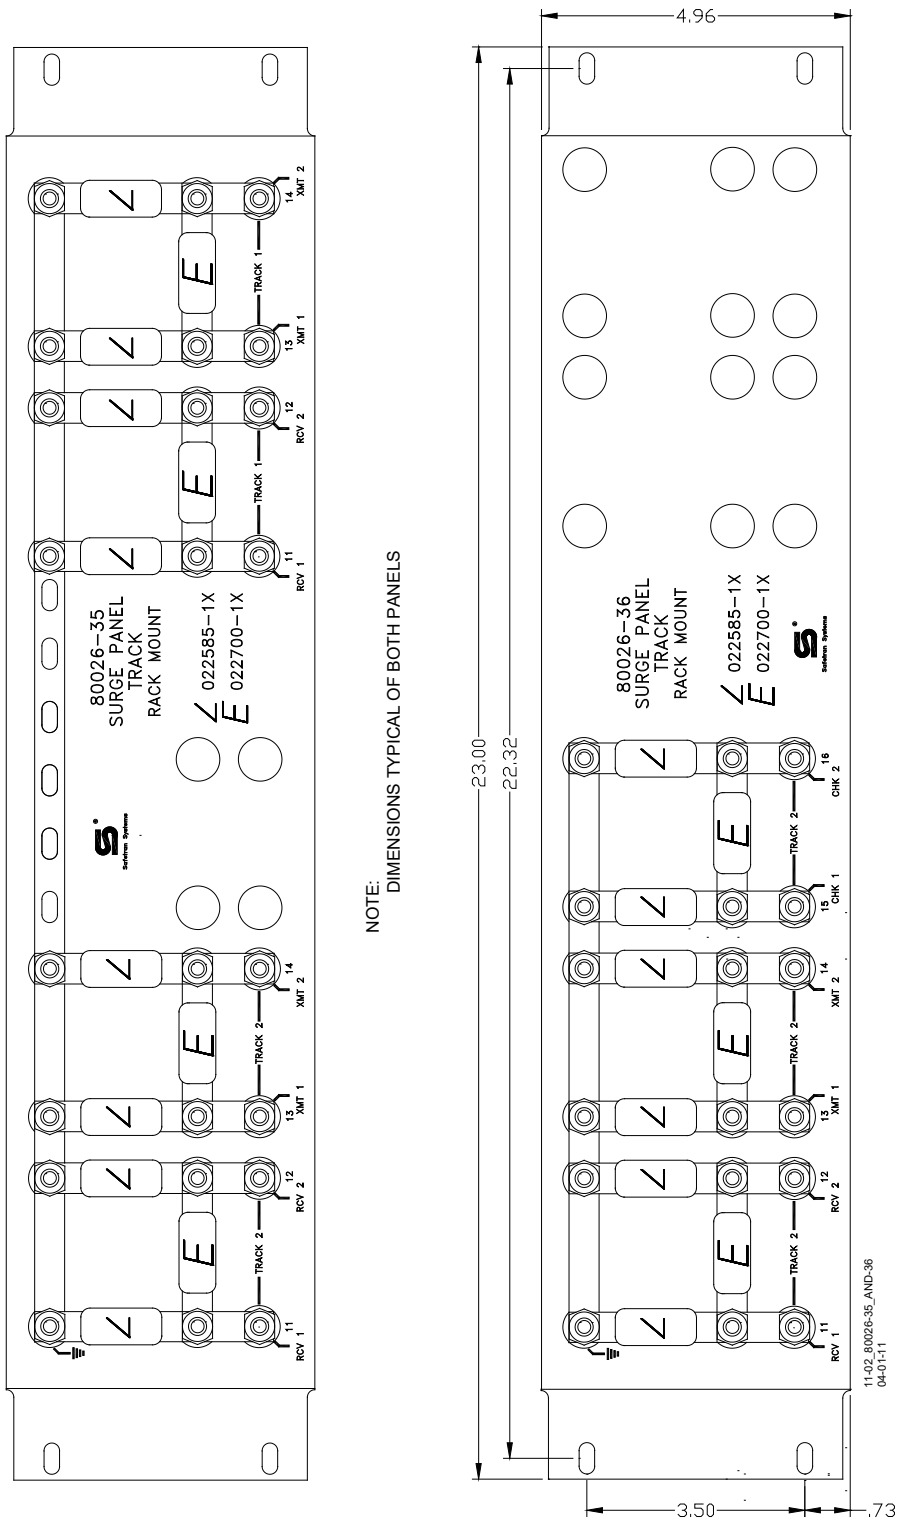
Rack Mounted Surge Panels, 80026-35 and -36
